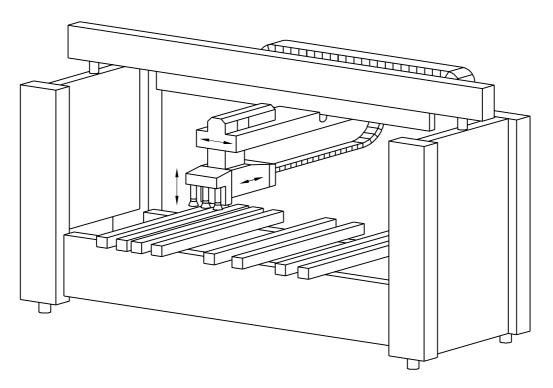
Example 2 of a portal frame machine (fixed portal, fixed table moving head)
